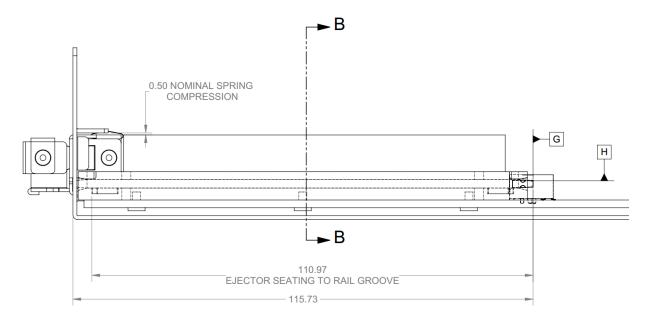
Small Form Factor Baseboard Chassis CTF Dimensions (Rear Rail Guide View)
